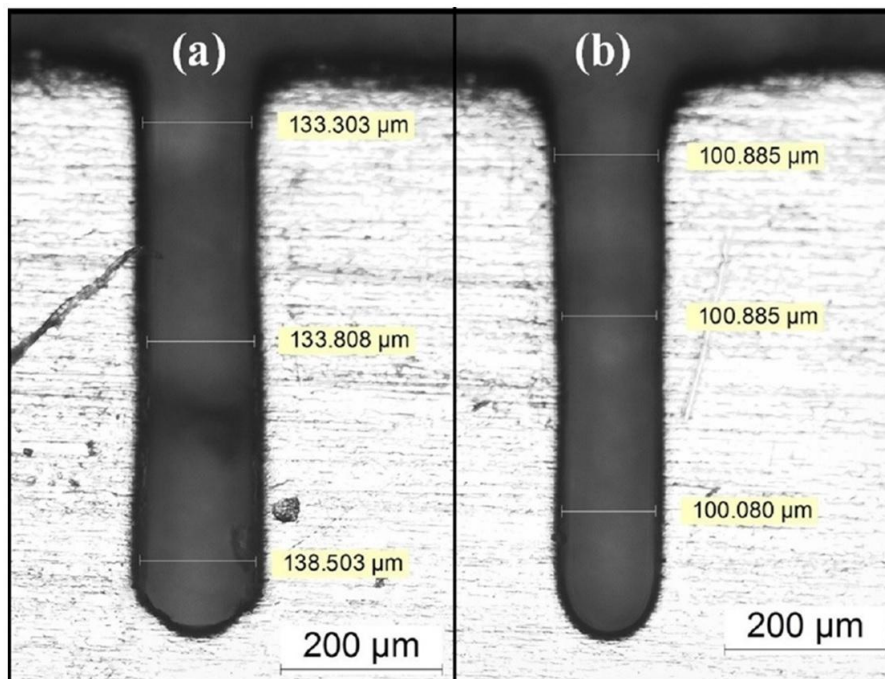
Fabricated microslits with PTFE tube wire electrode coating with the following conditions of exposed wire angles (a) 360° (b) 180°
